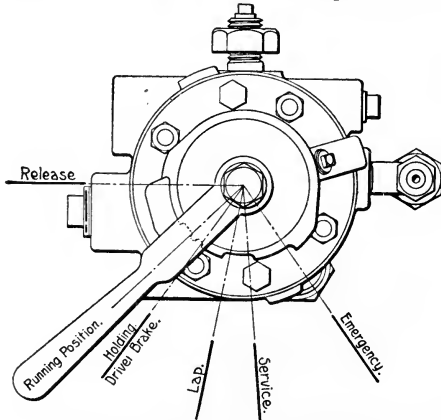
Top View of Automatic Brake-Valve, Showing Six Positions of Handle.
